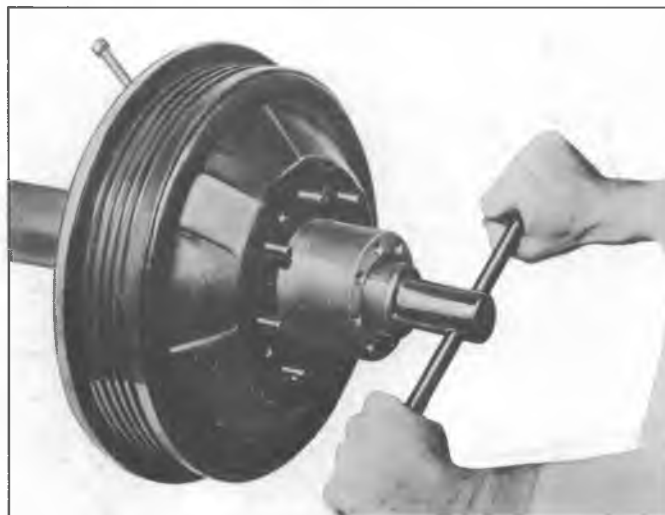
Bearing Adjustment Nut Removal (Typical)
